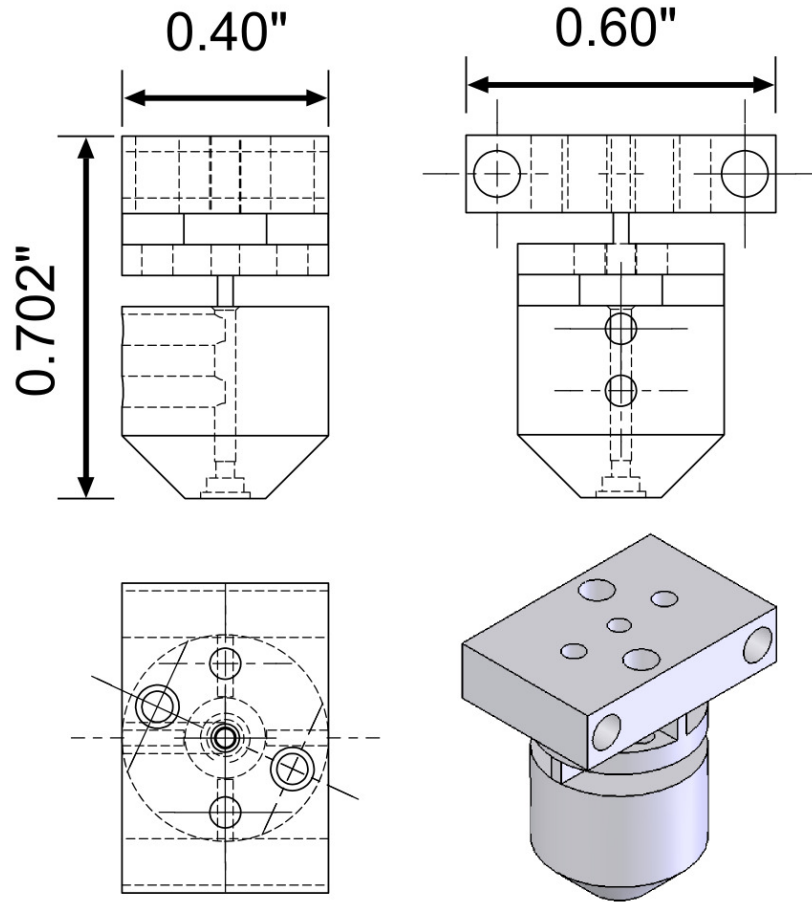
Optical fiber holder drawing. The figure shows technical drawings of the fiber holder from three different angles and a three dimensional rendition viewed from an angle askew to the principle axes of symmetry. The drawings represent the lens-mounted version of the fiber holder discussed in the text. The pocket for the lens is located on the bottom of the part in the top two drawings. The fiber holder for the Bragg reflector fiber looked similar but did not have this pocket.
